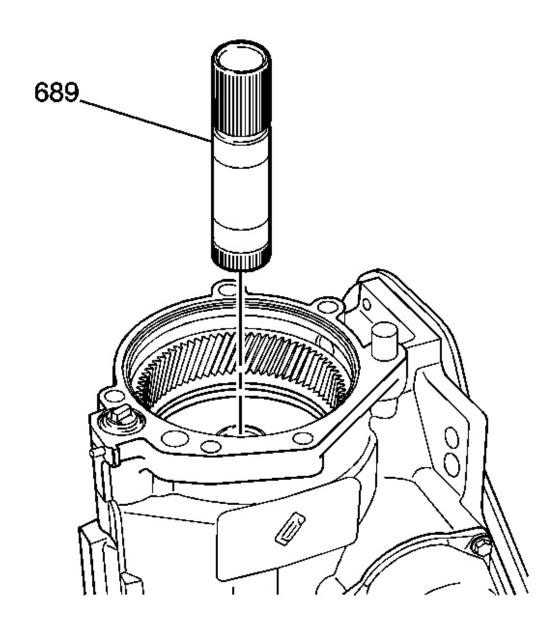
Identifying Final Drive Sun Gear Shaft Courtesy of GENERAL MOTORS CORP.
